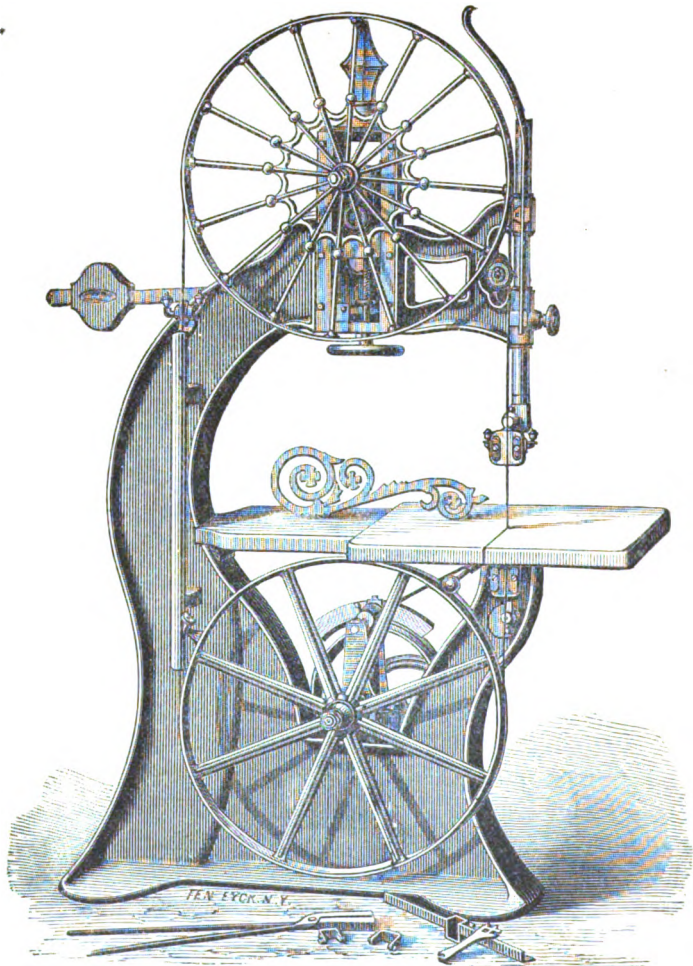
FAY'S PATENT BAND SAWING MACHINE.
